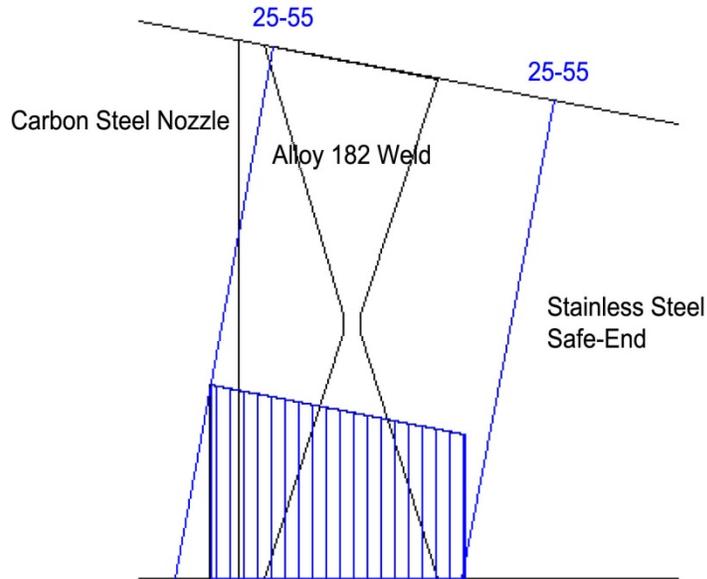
Steam Generator Cold Leg Nozzle Weld Circumferential Scan CRV Coverage Assessment
